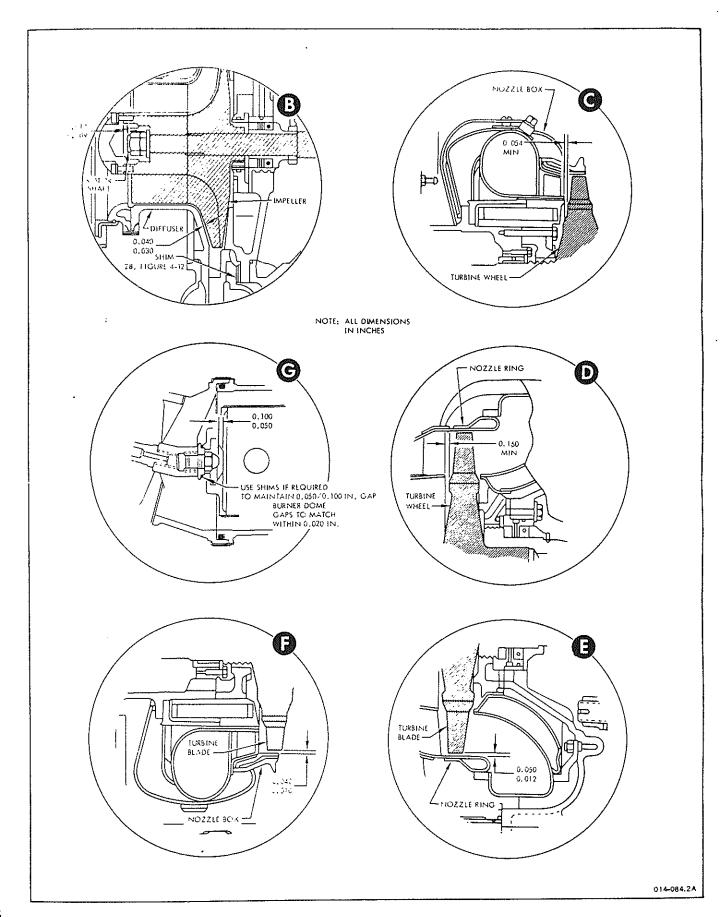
Engine Limits and Clearances (Sheet 2 of 2)
